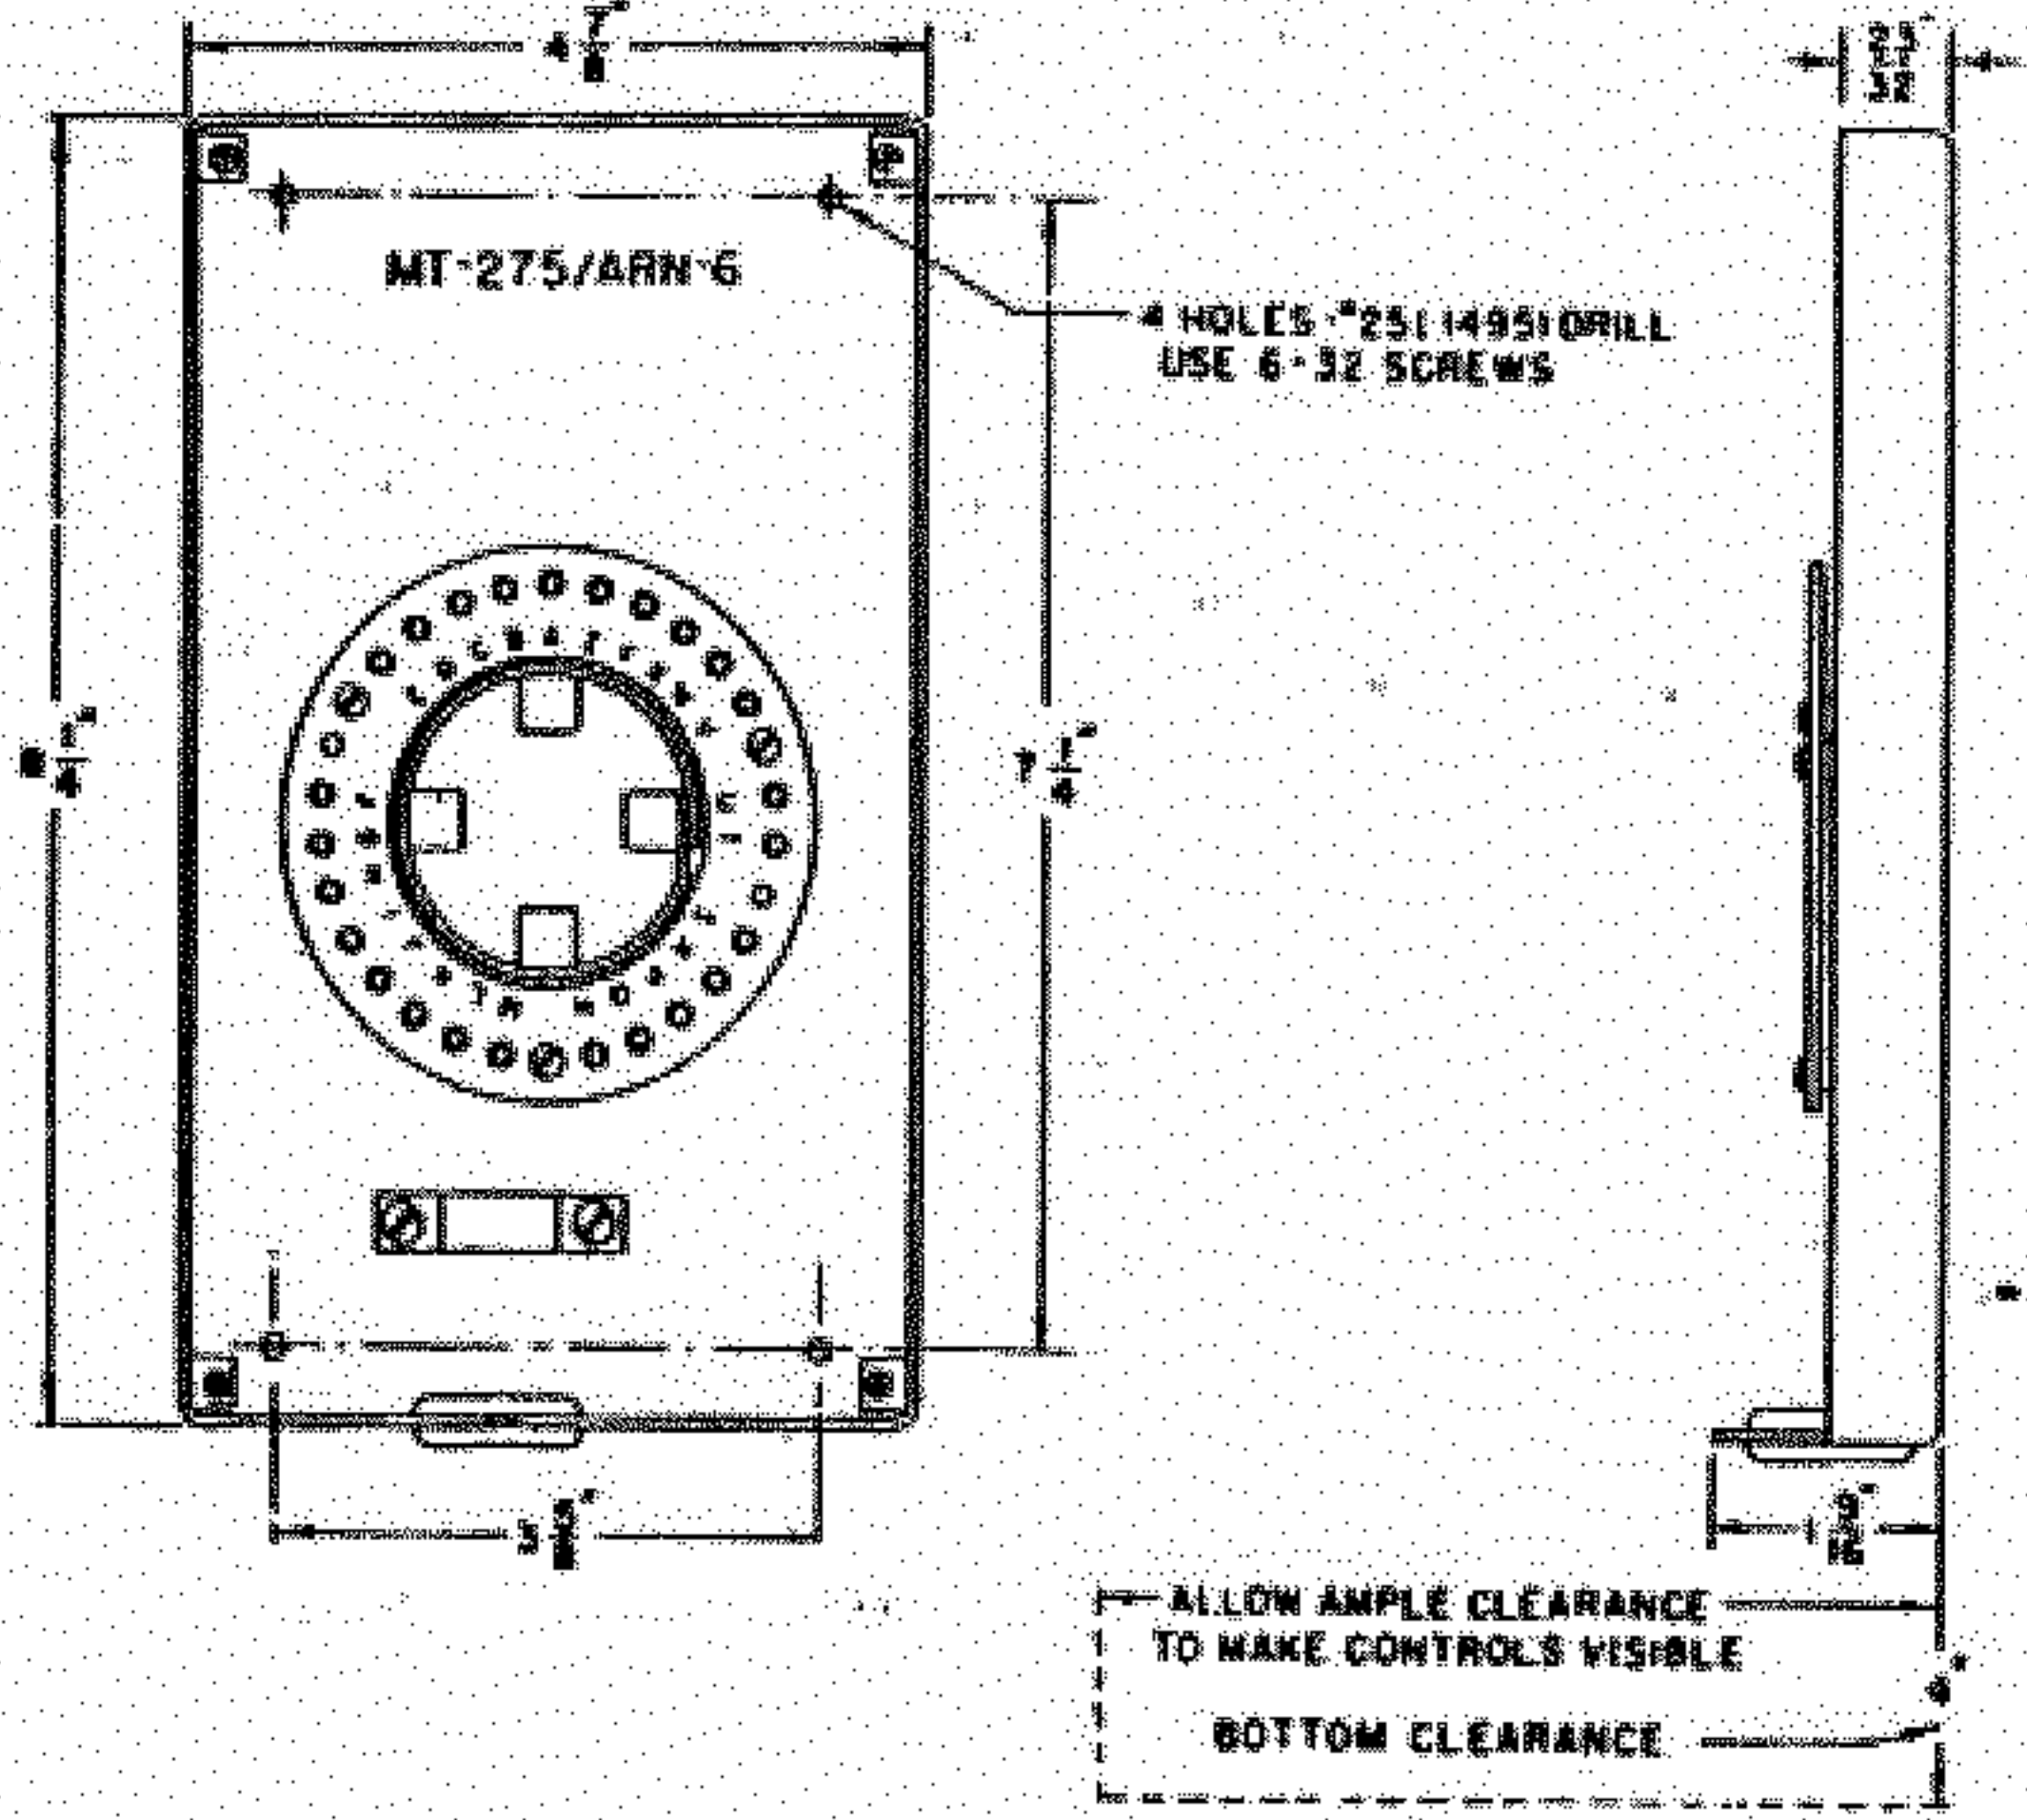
Mounting MT-275/ARN-6, Outline Drawing
